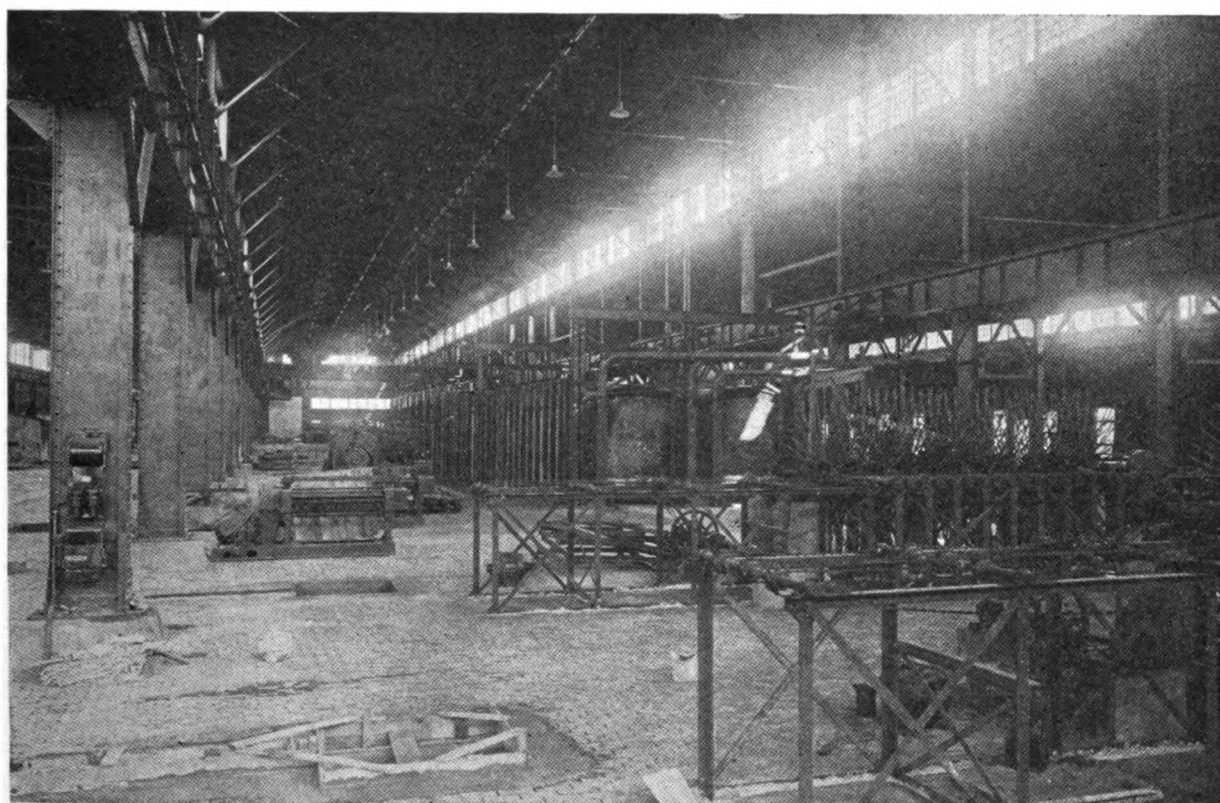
Inside view of mill showing cooling racks in foreground, annealing furnaces in center and roll stands beyond the annealing furnaces.
